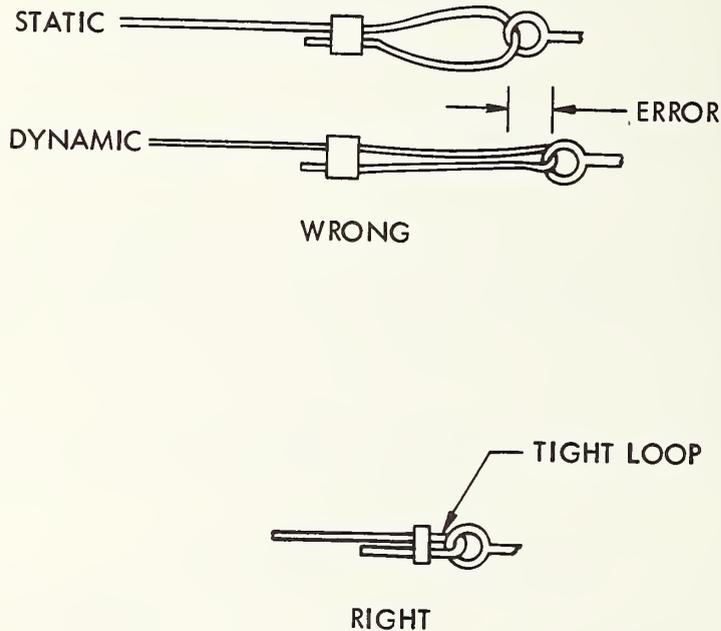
AUXILIARY COUPLING CABLE END-LOCK TECHNIQUE
